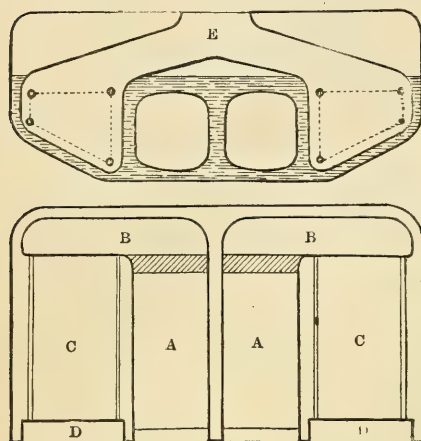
Low Boiler for Despatch Boats. Transverse and Horizontal Sections. A A, Furnaces. B B, Combustion chambers. C C, Tubes. D D, Smoke-boxes. E, Uptake.
